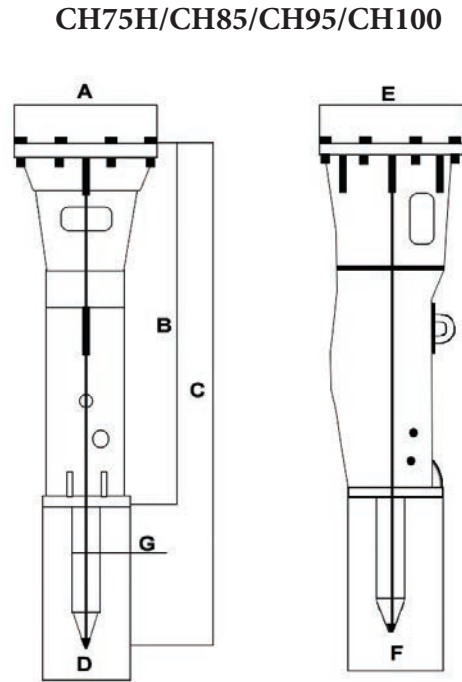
CH75H/CH85/CH95/CH100 Main Dimensions
